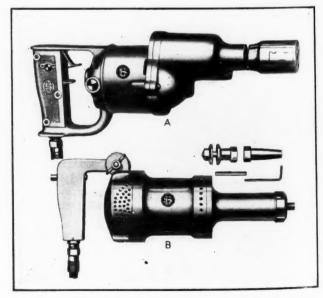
Tapper and Grinder made by the United States Electrical Tool Co.
